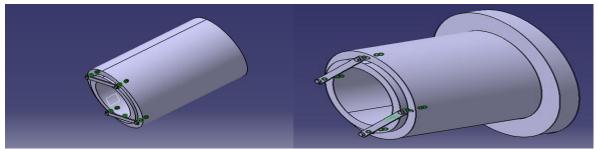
Assembly CAT Product of Hydraulic Couplings
